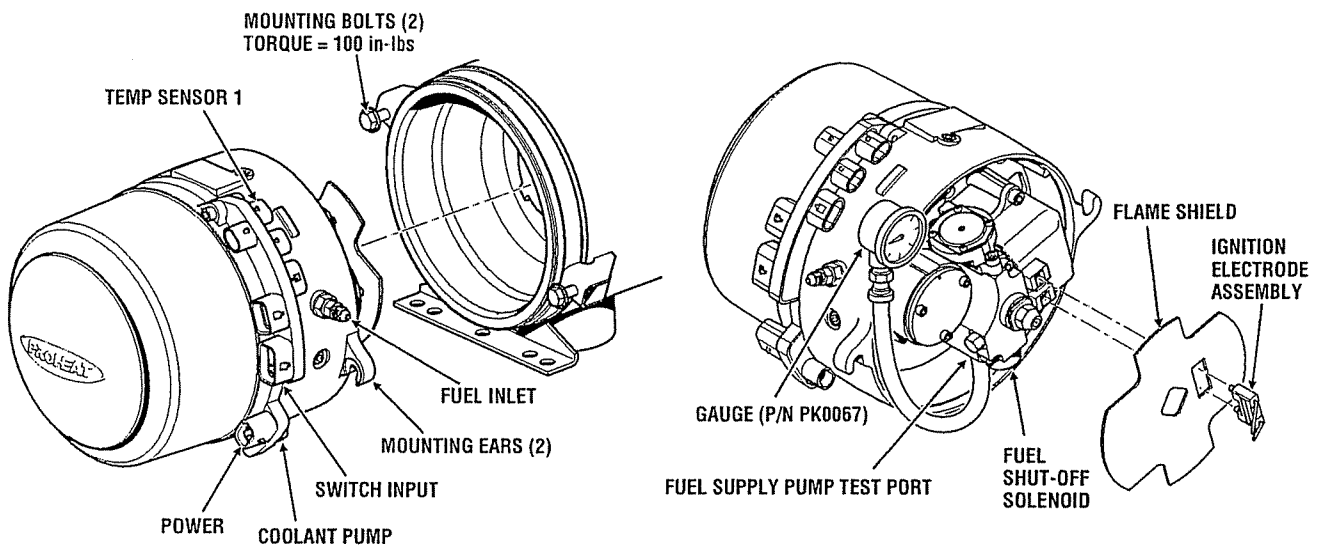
Burner Head Removal and Fuel Pressure Test
